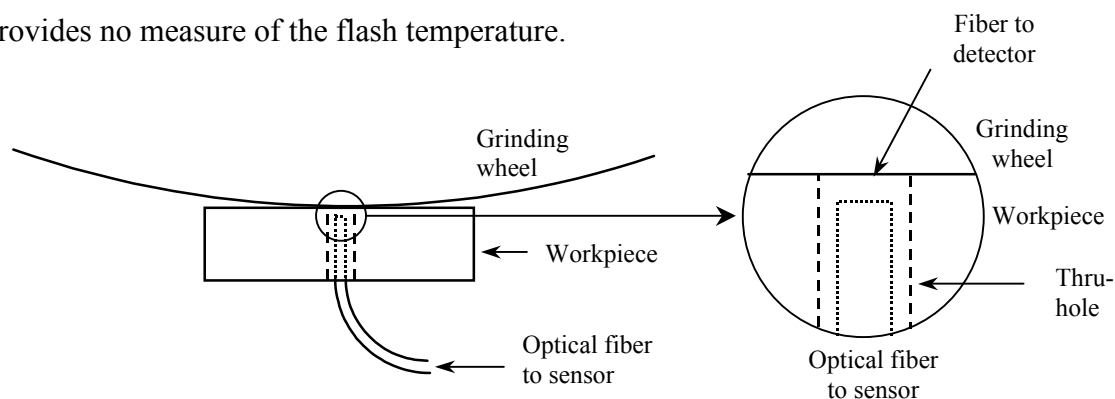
“Thru-hole to wheel surface” test arrangement
